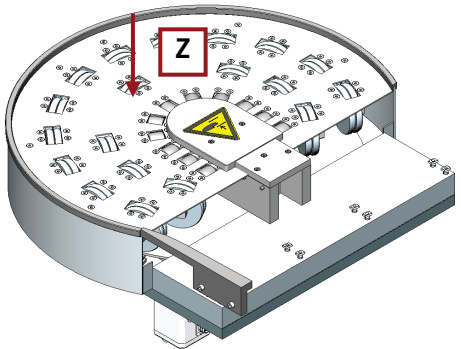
Radius Circuit mounting kit for EBM EC motor – 930 158 001
